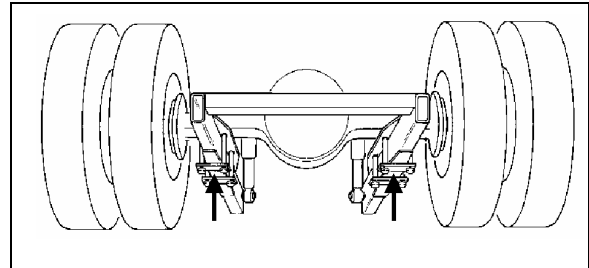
JACKING POINTS ON DRIVE AXLE H3B762
